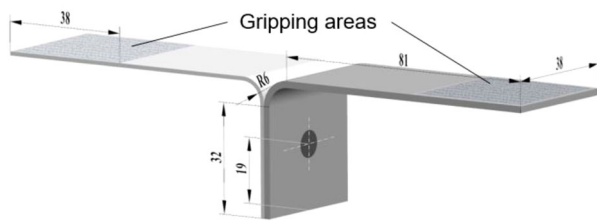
Schematic diagram of spot weld locations on coach peel coupon. All units are in mm.
